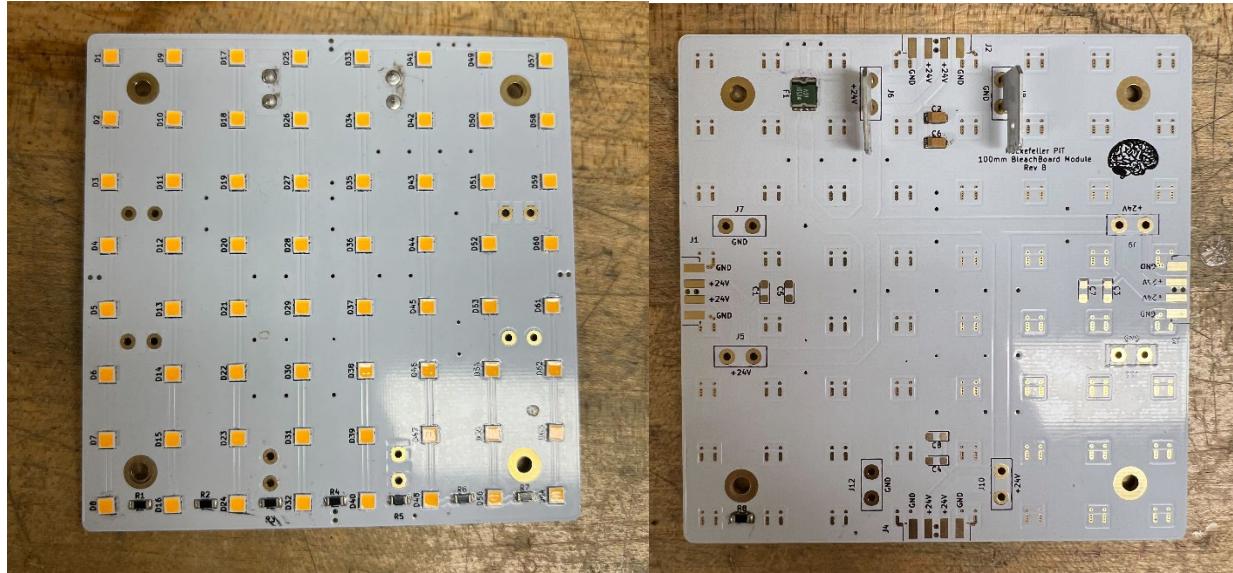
A fully assembled LED PCB board, showing top (left), and bottom (right). The top consists of the LEDs while the bottom consists of the fuse, capacitors, and connectors.
